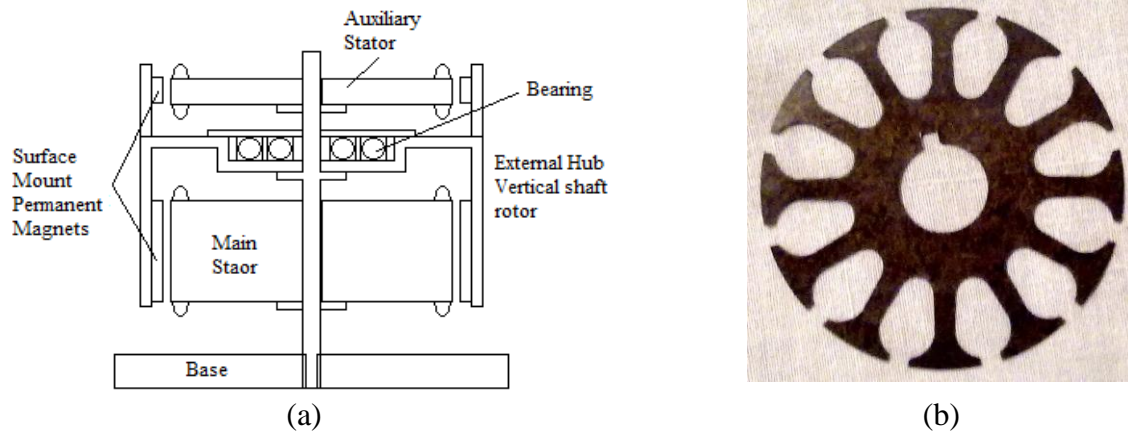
(a). Axial Cut view of the developed machine (b) Details of stamping used
